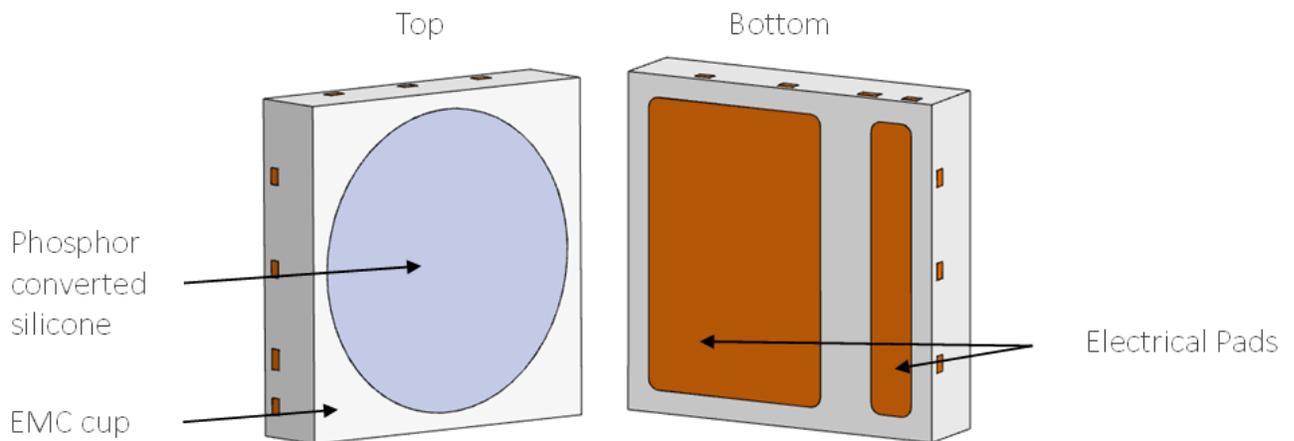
Top view (left) and bottom view (right) of the LUXEON Versat 3030 ST RO
